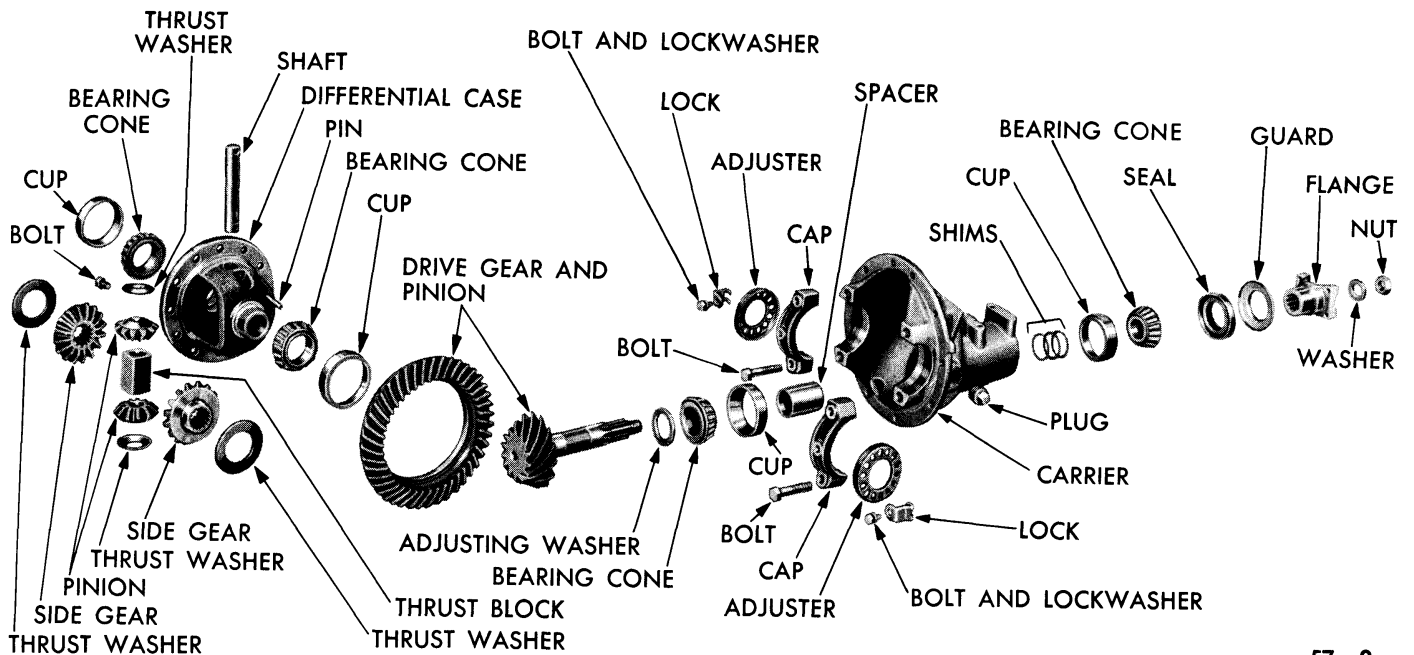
Rear Axle V-8—8 $\frac{3}{4}$  inch Ring Gear
